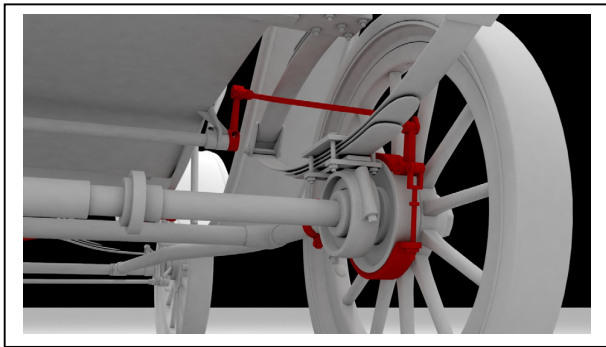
Brake mechanism rebuilt using 3D modeling of existing dismantled parts and photos of a similar car from the Bewley Museum.
